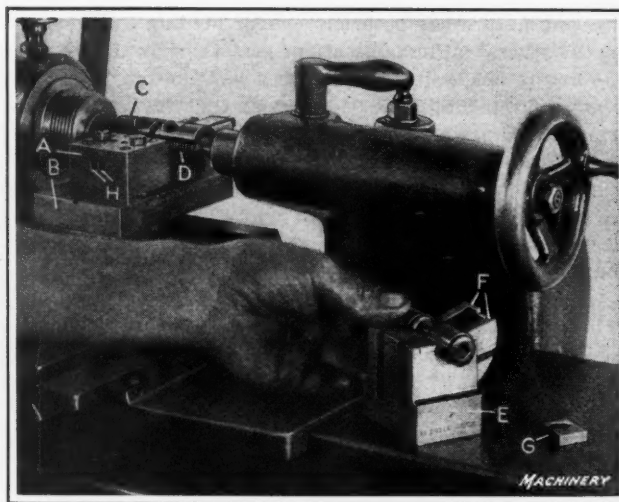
Gaging Equipment used for testing the Screw and for centrally locating the Tool-block
